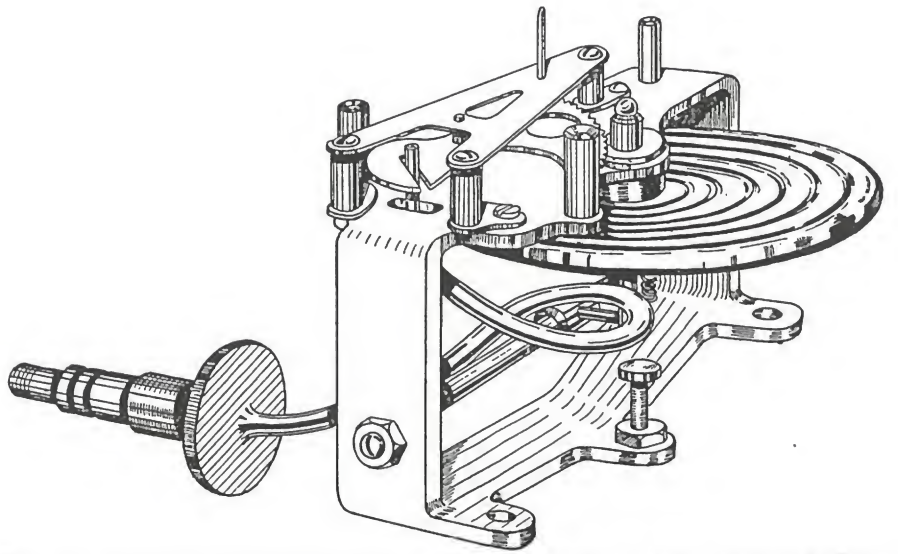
SHOWING CONSTRUCTION OF AIR SPEED INDICATOR (CAPSULE TYPE)
